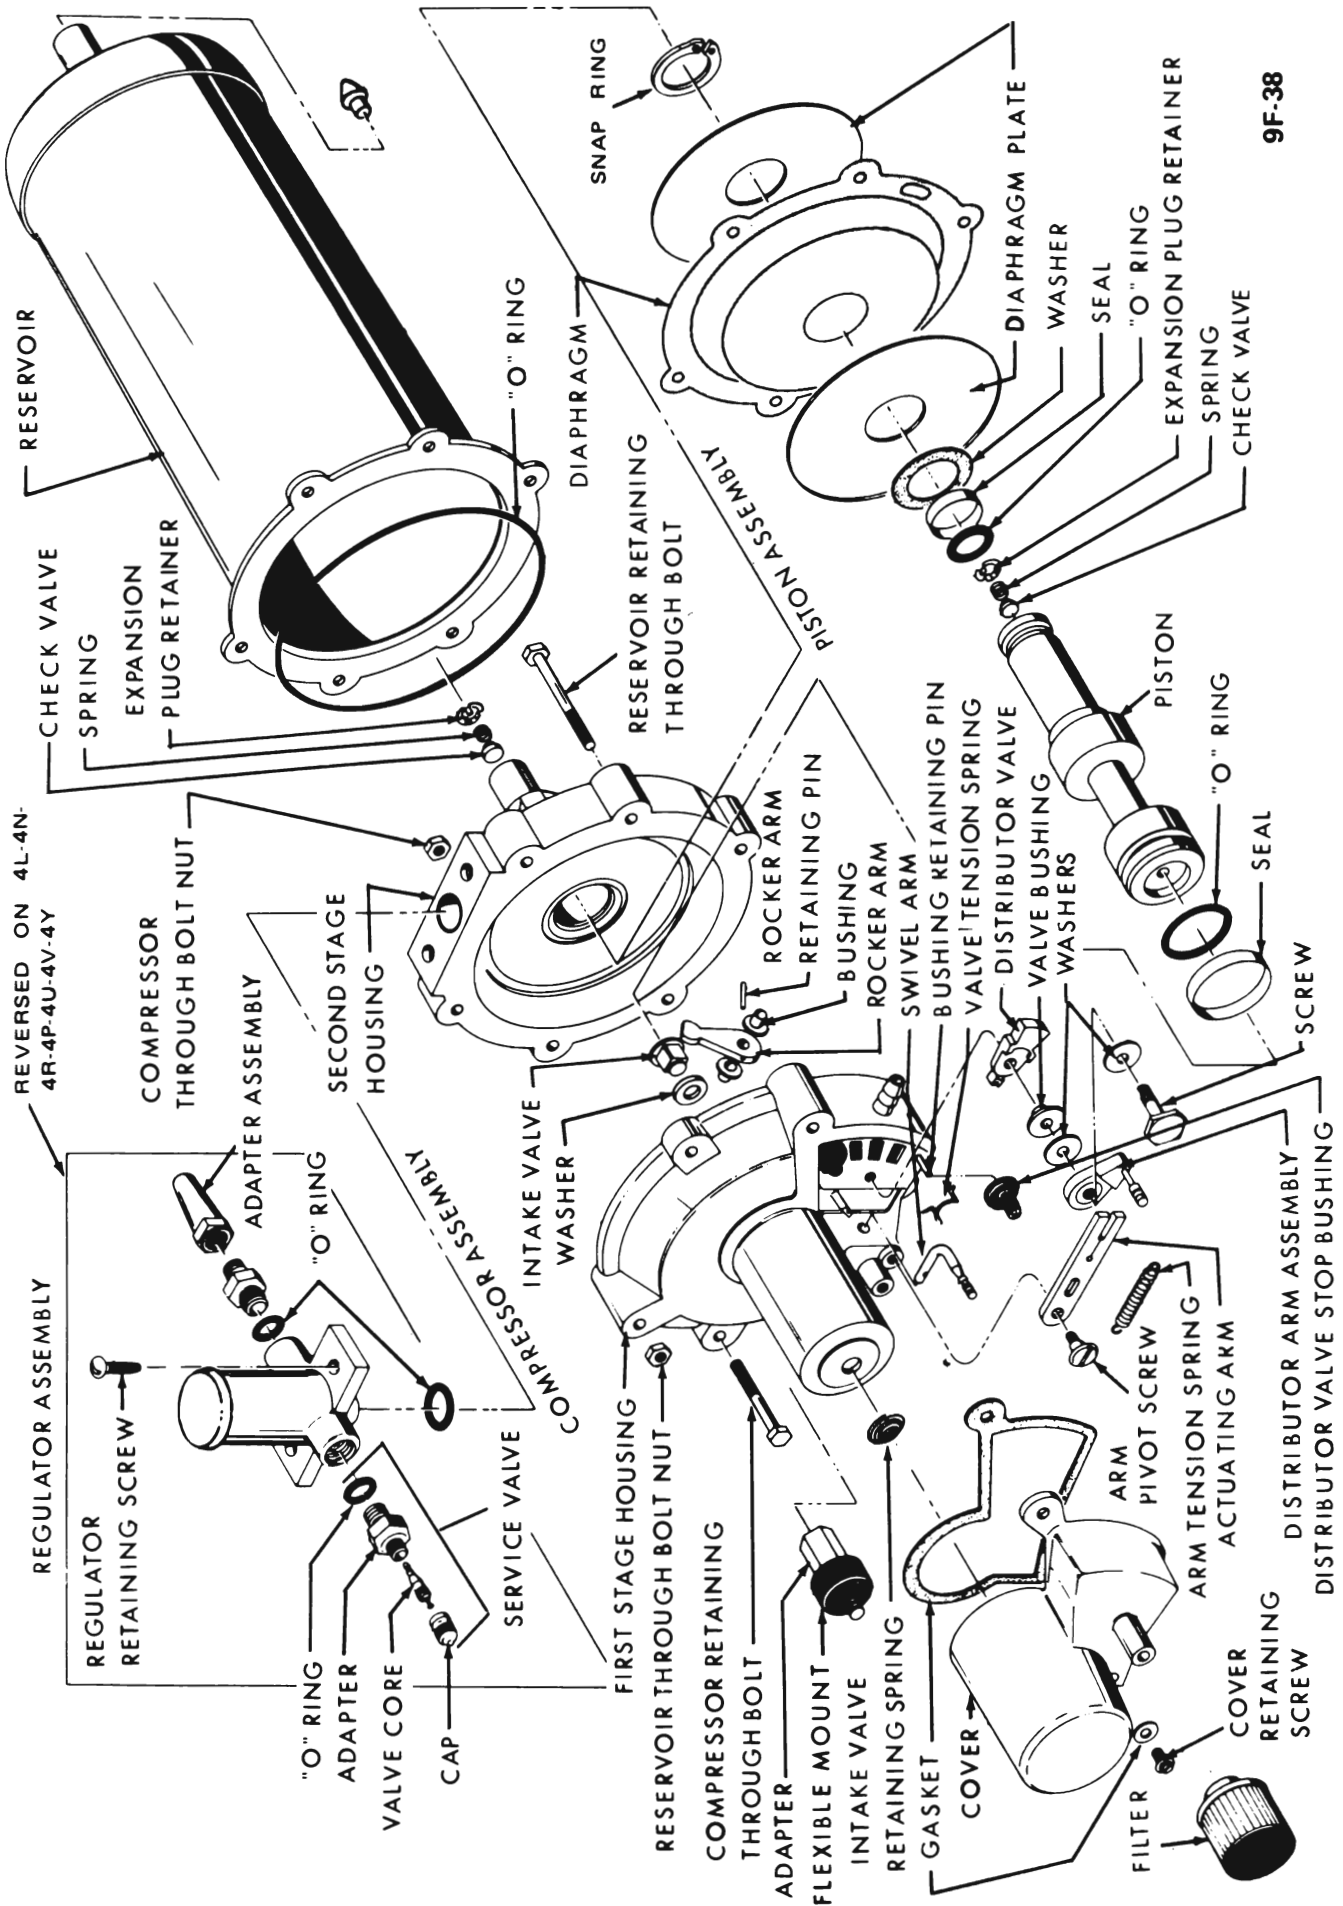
F-36 - Compressor Reservoir Tank and Regulator Valve Assembly - Exploded View
